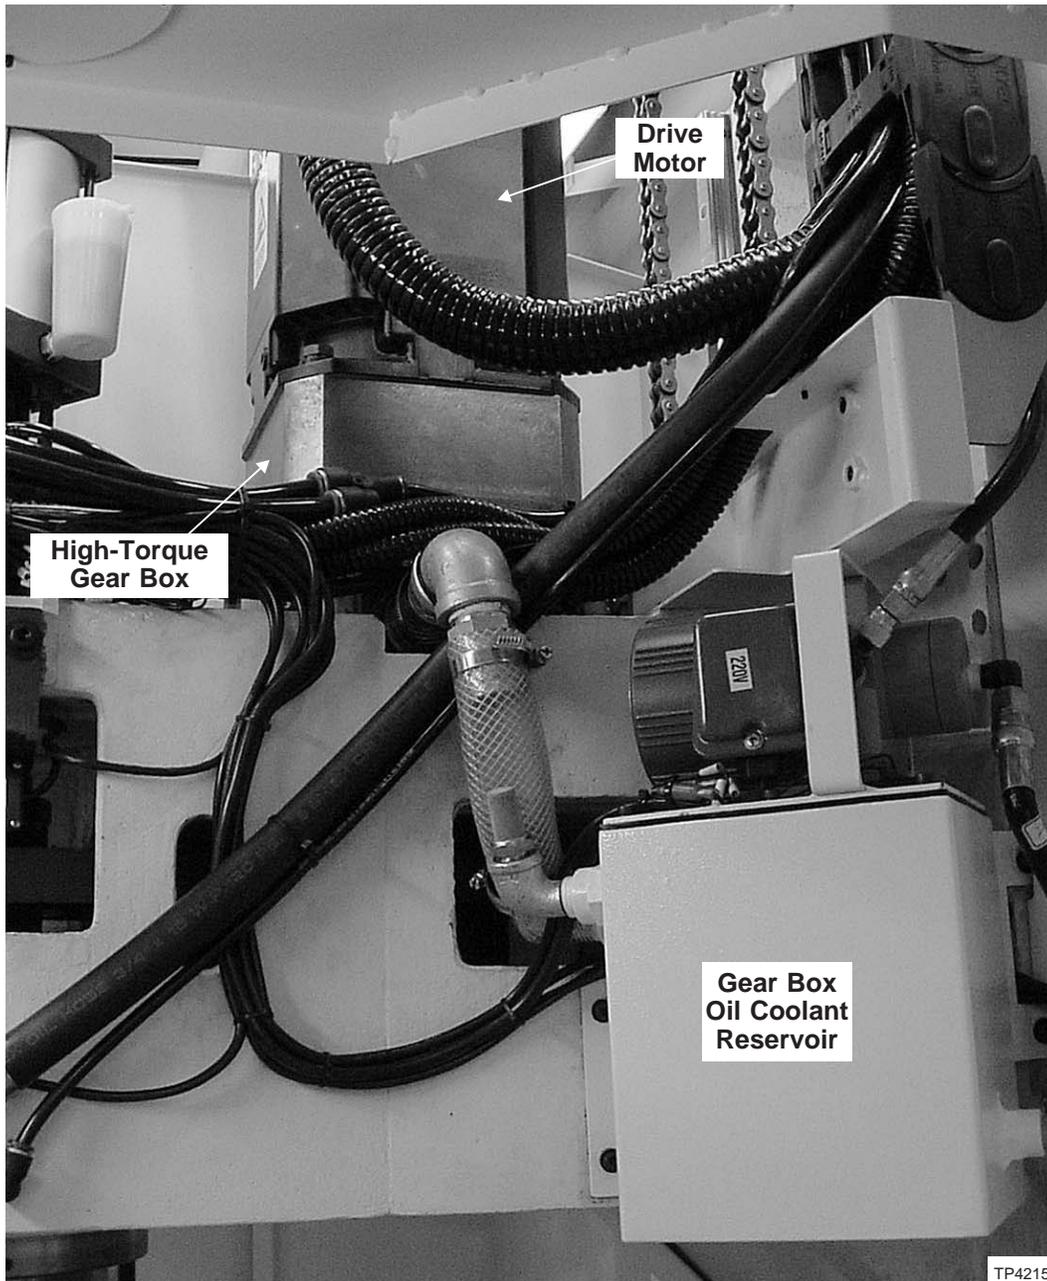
High-Torque Spindle Gear Box and Oil Coolant Reservoir
